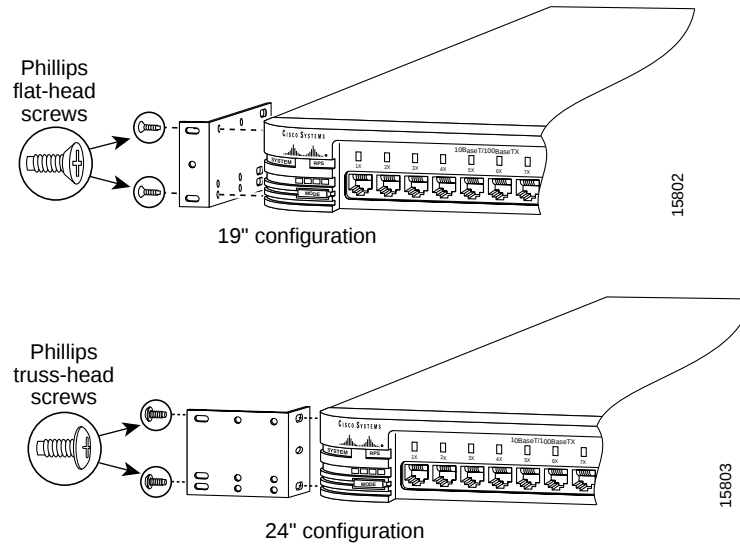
Attaching Brackets for 19- and 24-Inch Racks (Rear Panel Forward)
